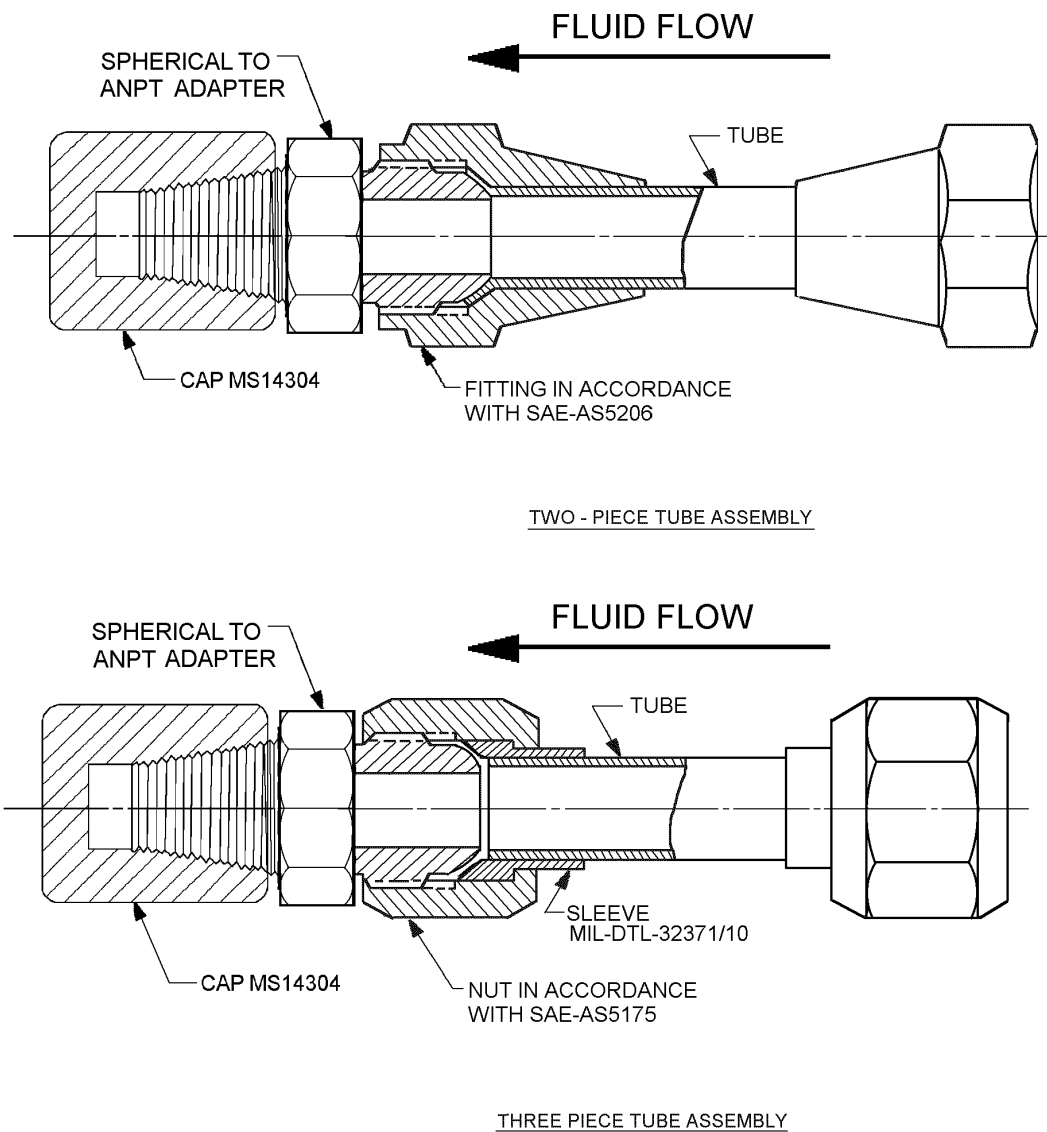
Typical assembly showing adapter fitting on tube assembly.
